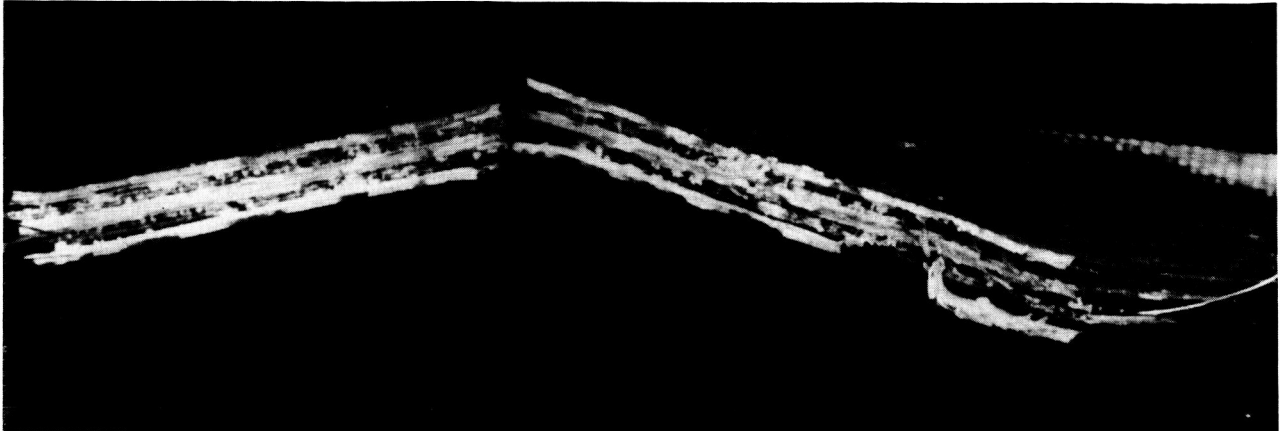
ALUMINUM + WIRE COMPOSITE TENSION SPECIMEN
